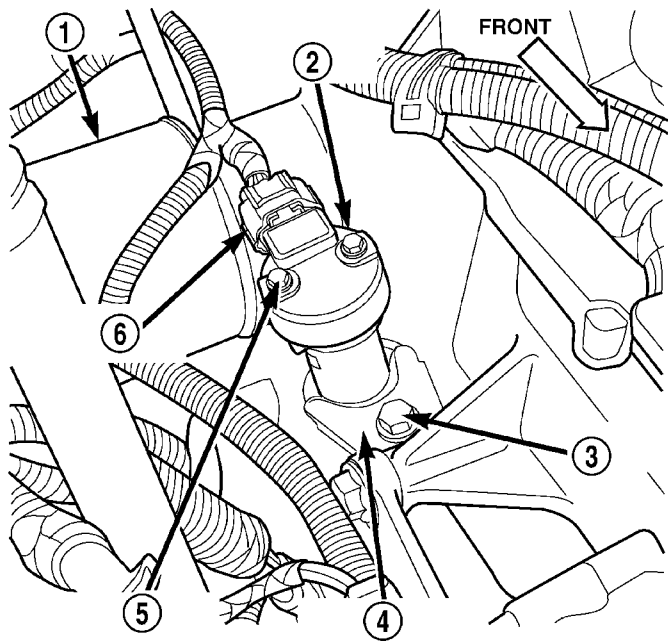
CMP and Oil Pump Drive Shaft—4.0L Engine
